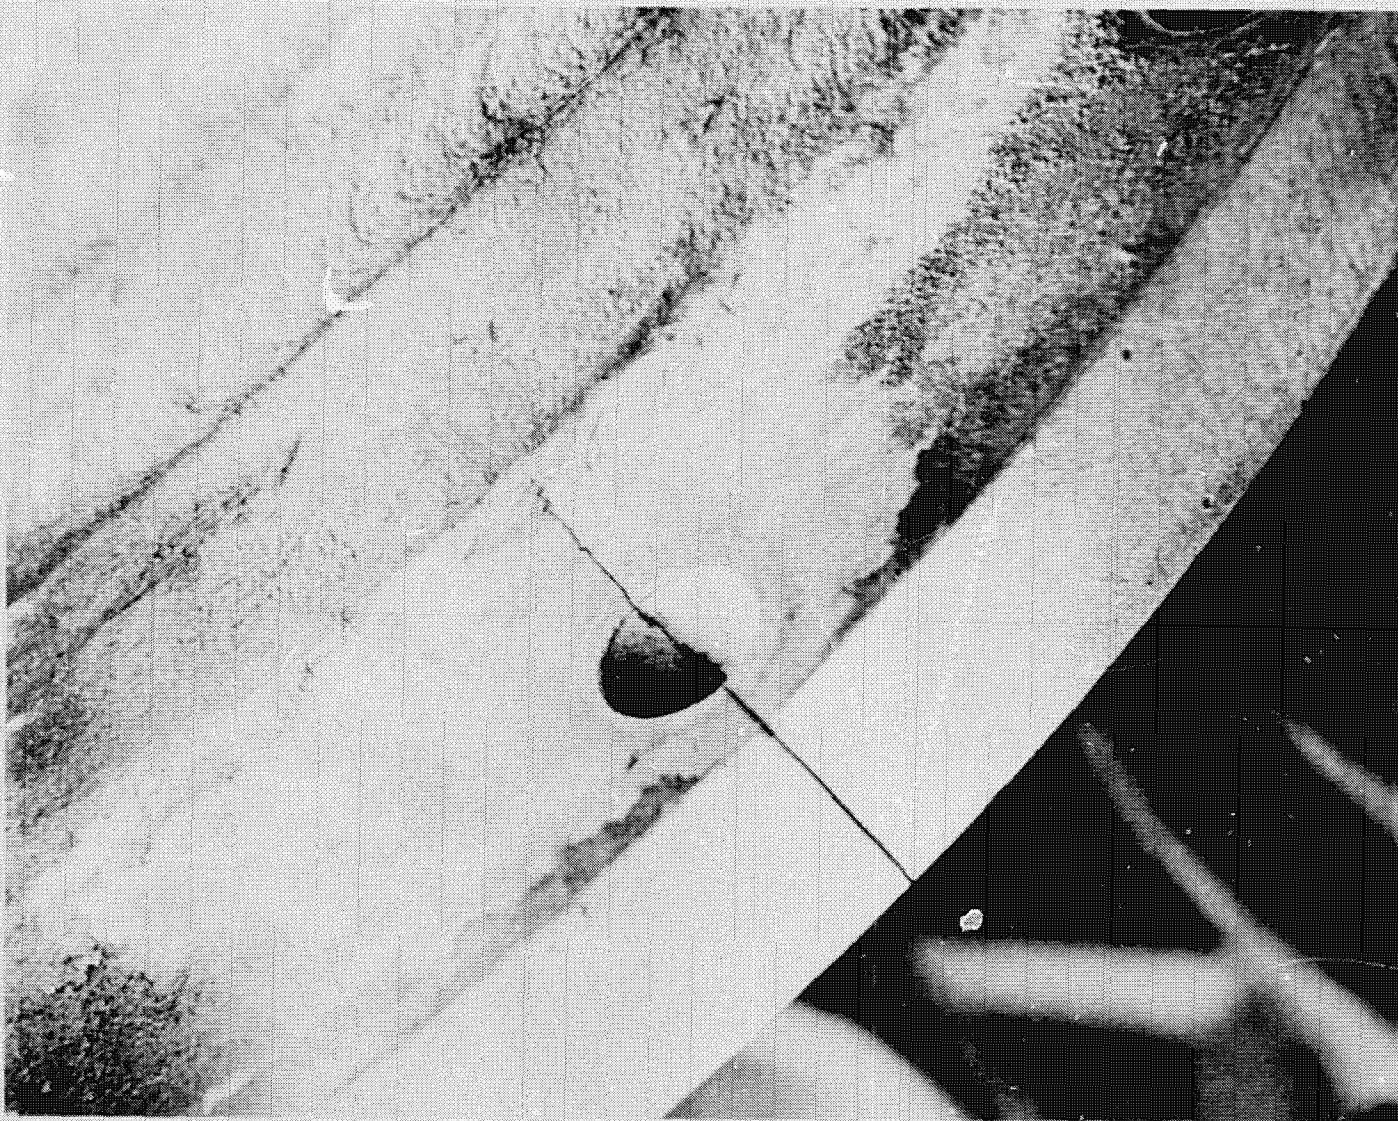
TYPICAL FAILURE OF A HEAT EXCHANGER TUBE SHEET/FLANGE ASSEMBLY
